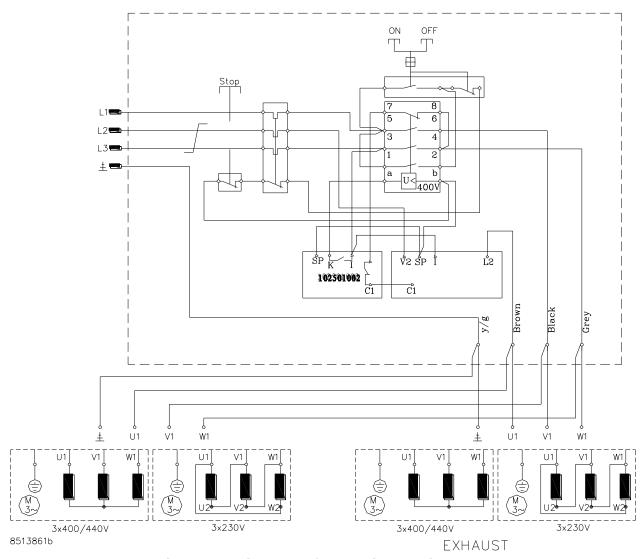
Diagram of belt grinder with brake and exhaustmotor.
